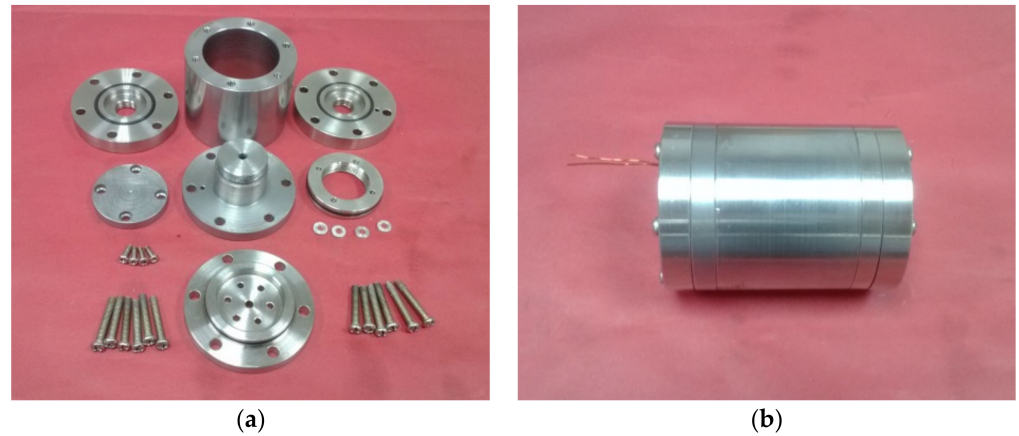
Photograph of the annular-radial-orifice flow MR valve: (a) valve parts, (b) valve assembly.
